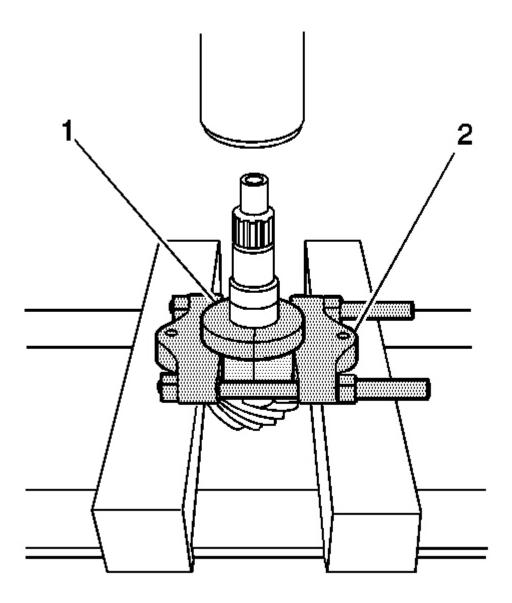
Identifying J 45871 & J 22912-01 Courtesy of GENERAL MOTORS CORP.
